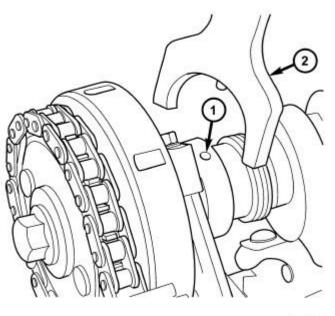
Camshaft Sprocket V6 Marks Courtesy of CHRYSLER LLC
